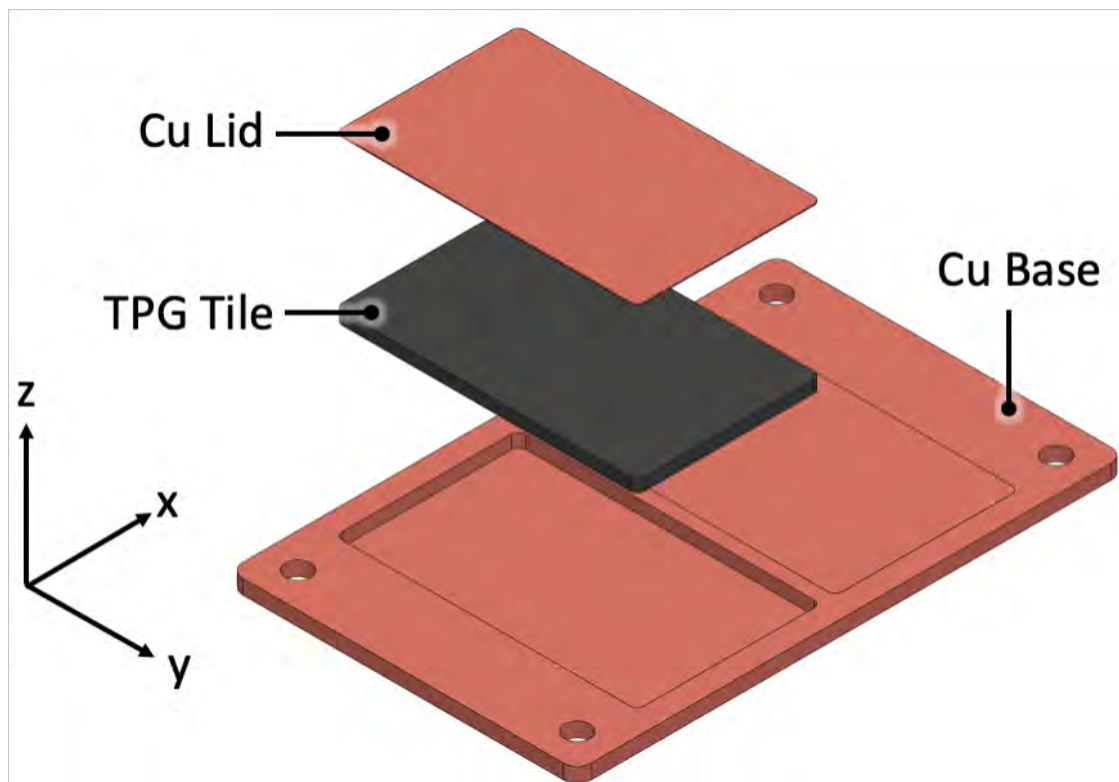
An exploded view of the TPG-encapsulated metal baseplate
